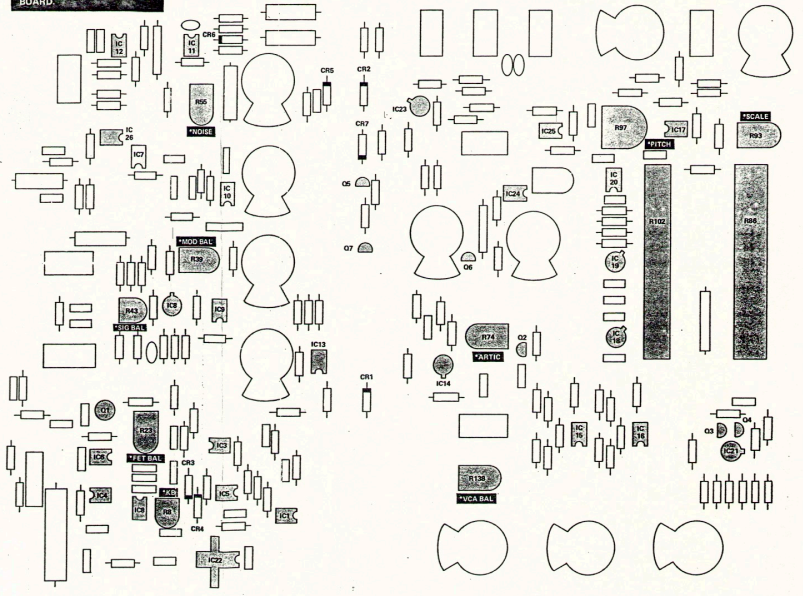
SIGNAL PROCESSING CIRCUIT BOARD ASSEMBLY (BOARD NO. 2) - SERIAL NO'S 1264 AND BELOW
